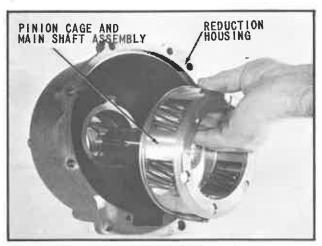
Assembling Pinion Cage and Main Shaft Assembly
